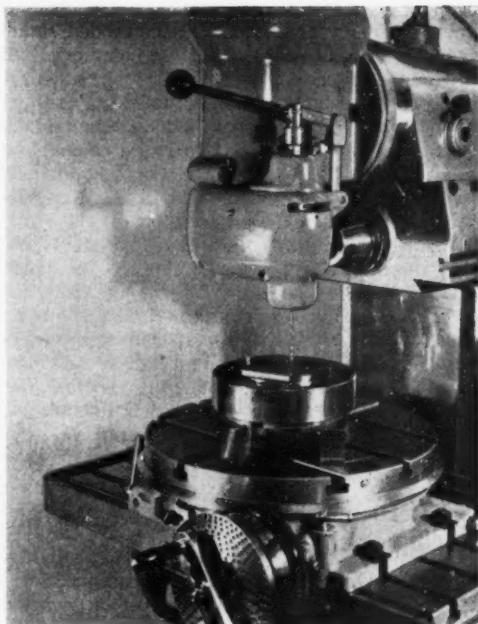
Close-up View Showing the New High-speed Drilling Attachment Mounted on the Milling and Drilling Head
